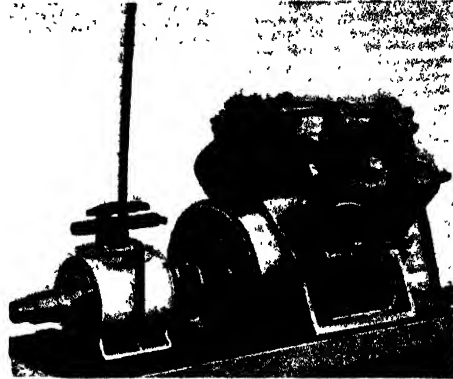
A Channel 24h.p. four-cylinder "V" engine and reverse gear. Weight of engine 475lb.
